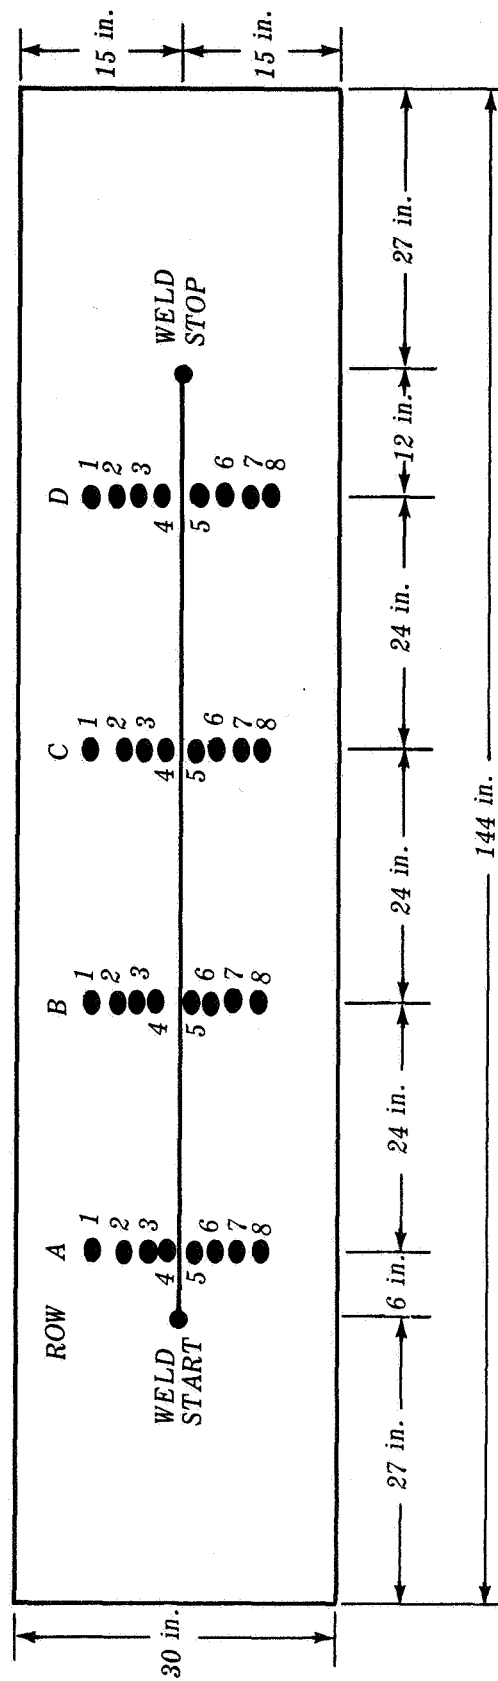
LOCATIONS OF DIAL INDICATOR CONTACT POINTS IN RELATION TO THE WELD
